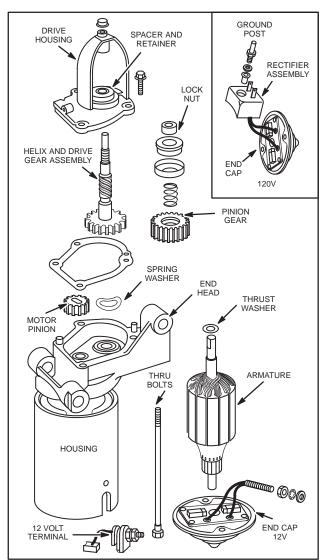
12V & 120V STARTER MOTOR, EXPLODED VIEW
